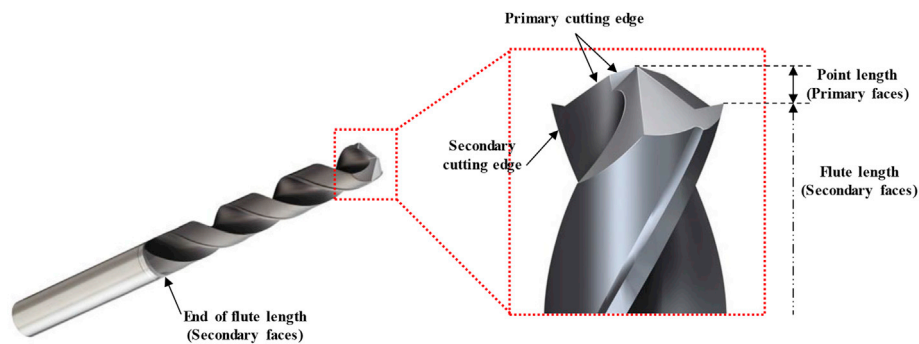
Representative schema of the used drilling tool geometry (provided by Sandvik Coromant).
